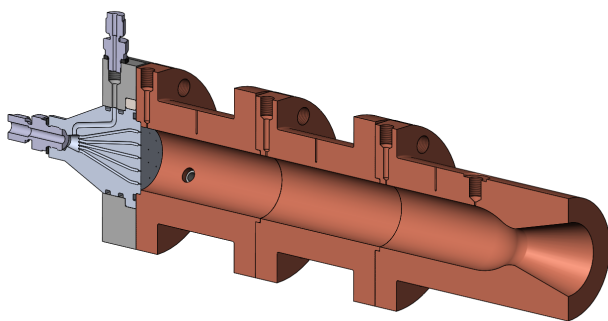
Section of the 3D printed aluminium injector block and copper heat sink combustion chamber as used in the NOFB tests.
